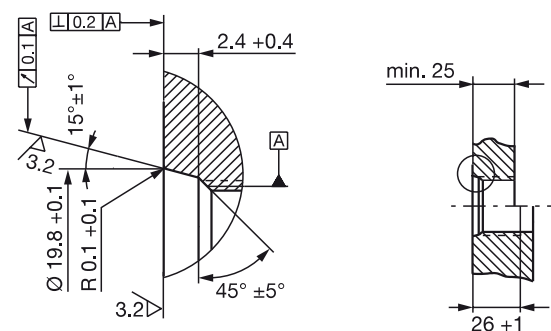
Mounting hole M18×1.5 per ISO 6149 O-ring 15.4×2.1
